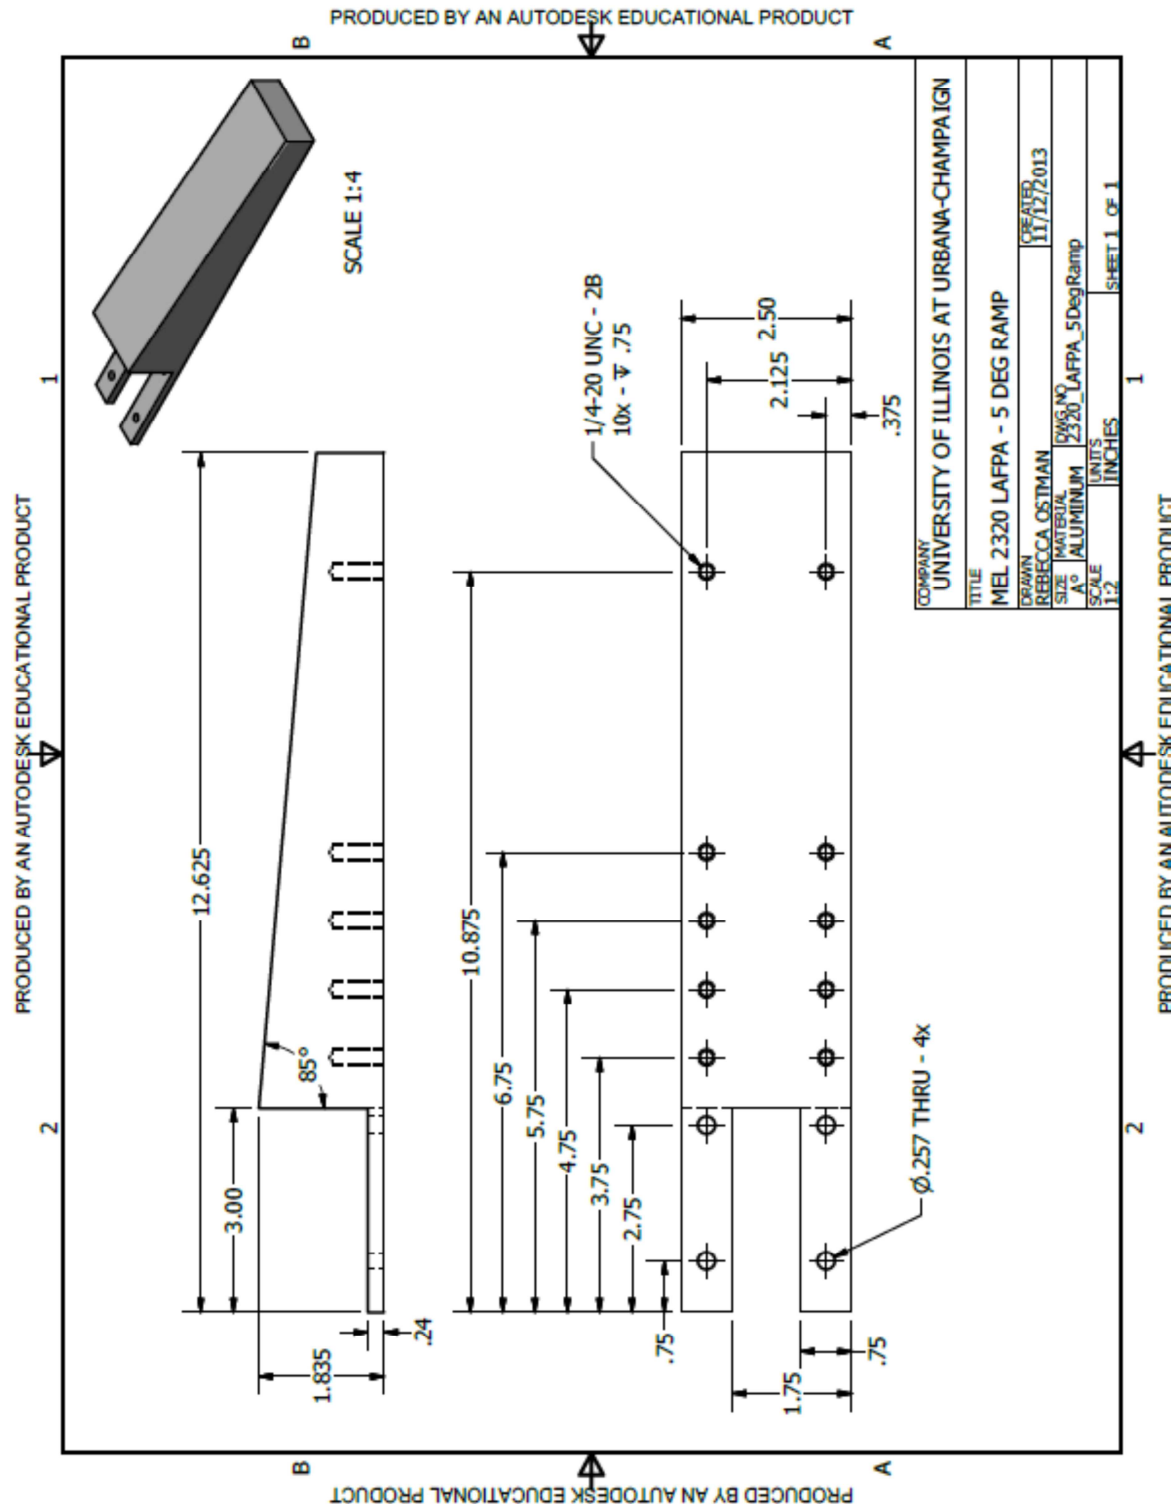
Drawing and specifications for the 5° ramp for the LAFPAs on the ramp corner assembly.
